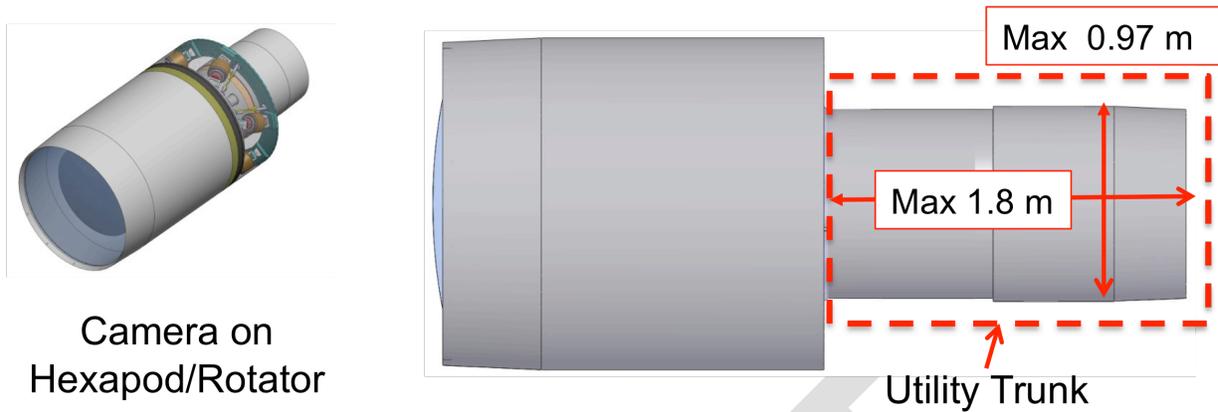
Design Envelope of Camera Hexapod/Rotator Assembly
